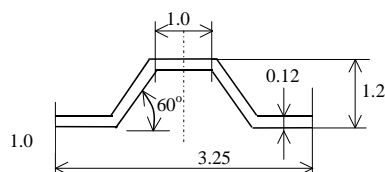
Cross-section of the corrugated trapezoidal plate segment
